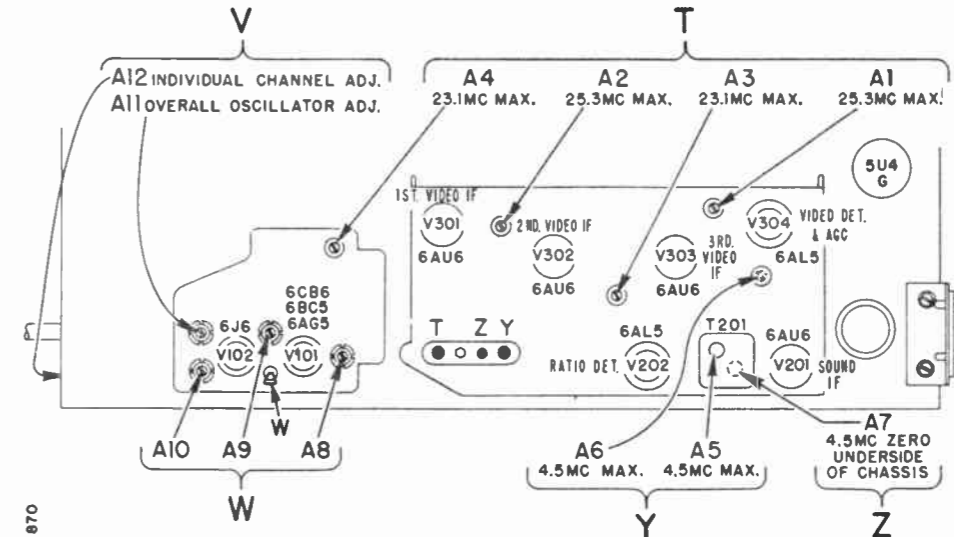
Top View of Chassis Showing Alignment Adjustment Locations.
